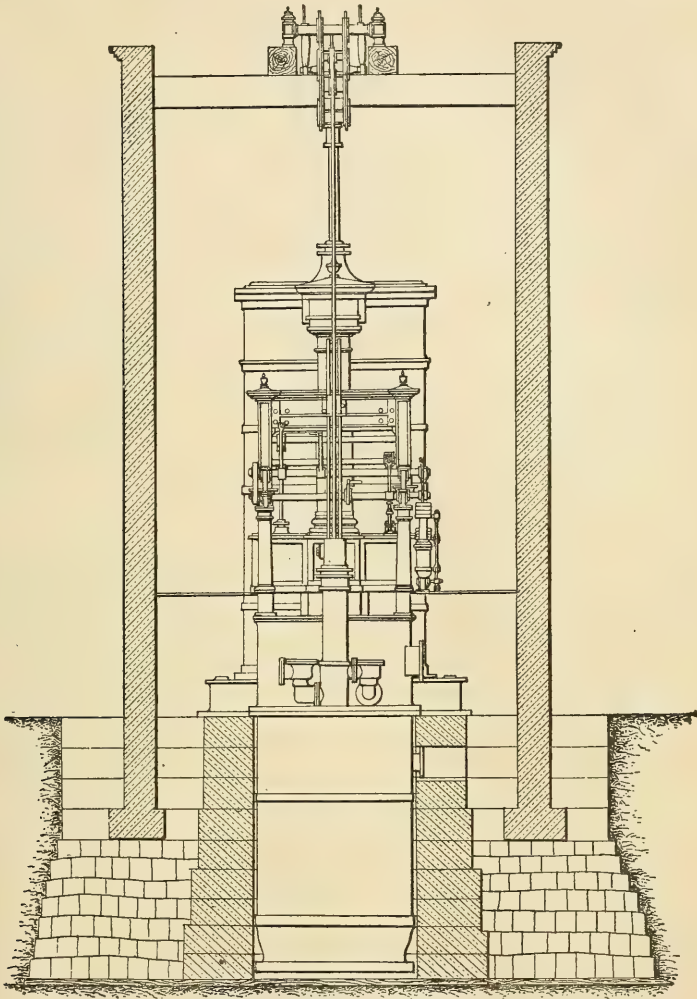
Direct-acting Pumping Engine. End Elevation.
